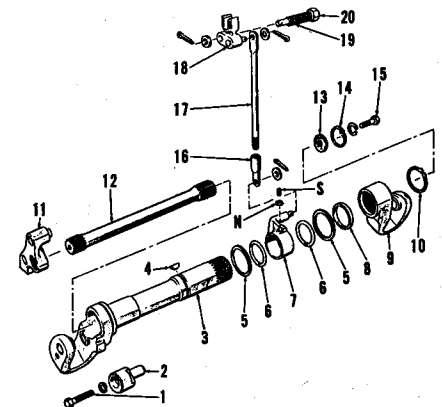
Exploded view showing torsion bar, lower link hangers and draft control linkage. Refer to Fig. 226 for adjustment of draft control link (16 and 17), and to Fig. 208 for adjustment of hanger stop (2).
